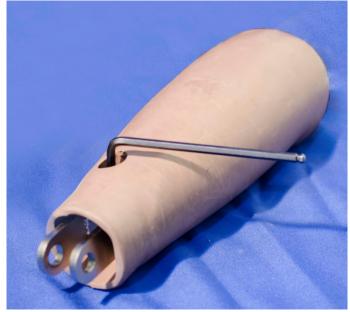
Secure lower wrist rotation assembly to lower arm
